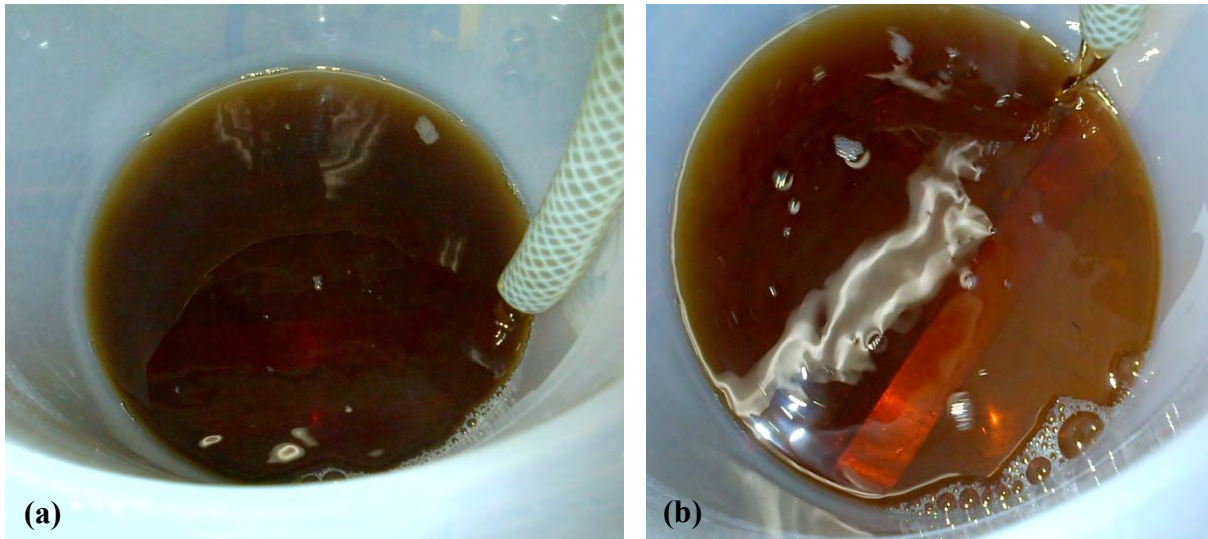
(a) Top view and (b) bottom-side view of the milling process.
